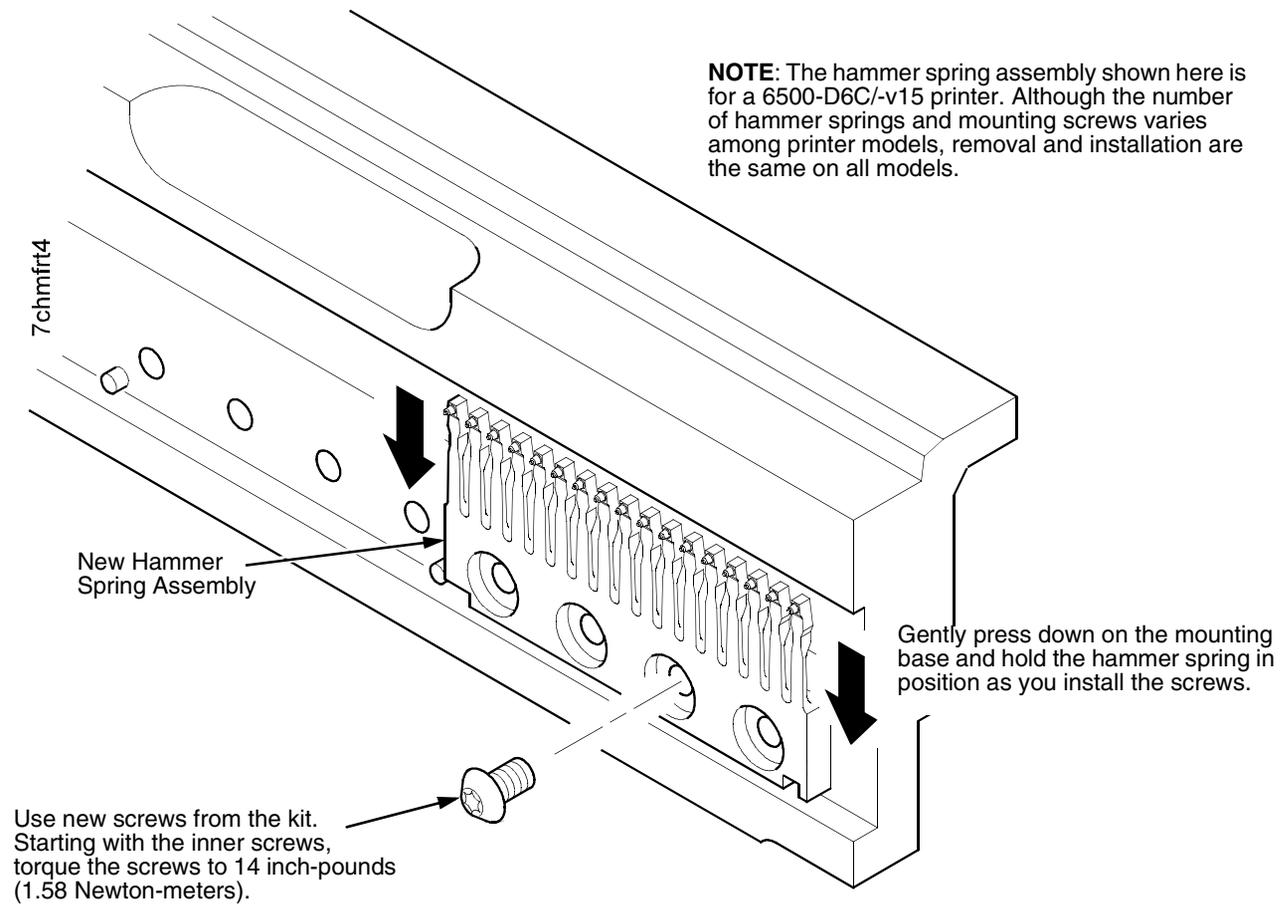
This figure shows how to install a hammer spring assembly onto the hammer bank.
